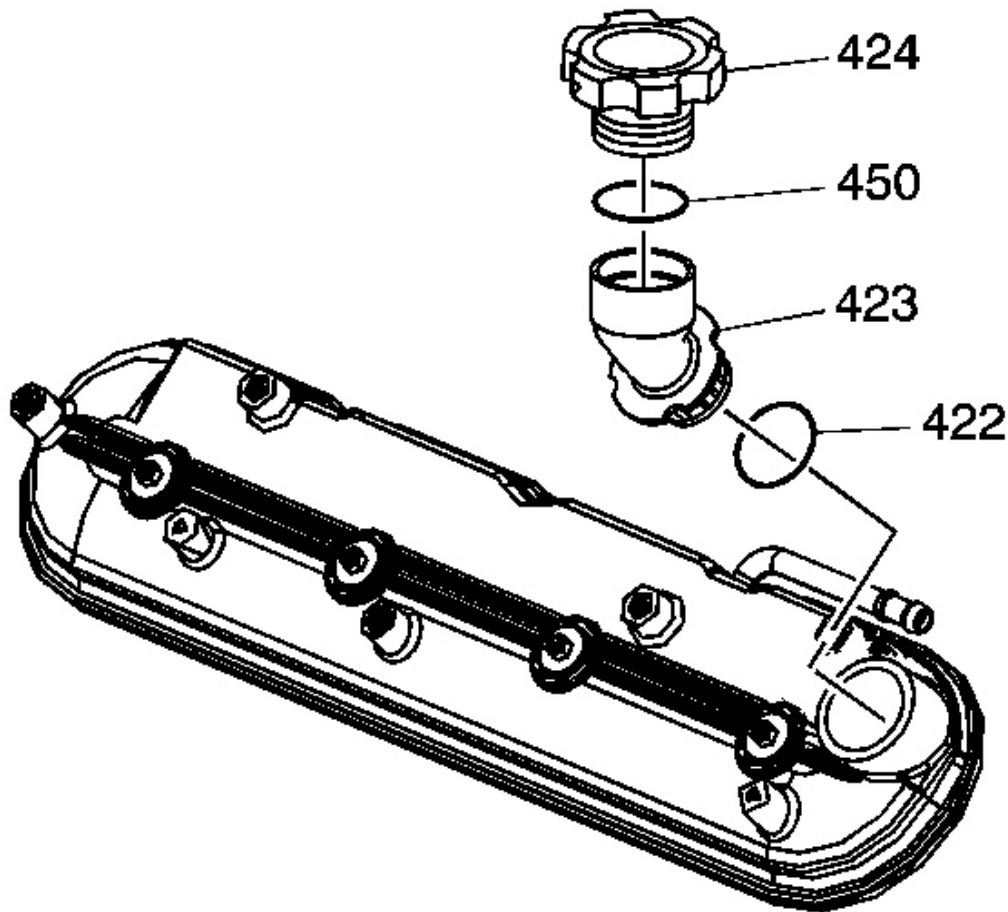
Identifying Oil Fill Cap & Oil Fill Tube
